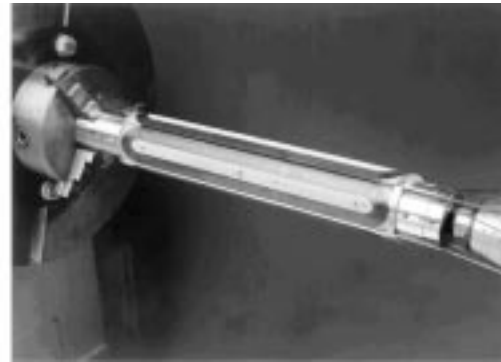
Assembly of MQTA coils. The coils are doweled to a precisely machined mandrel. A glass fiber plate is mounted at the connection end to support the connections and the assembly glued together using epoxy resin.
